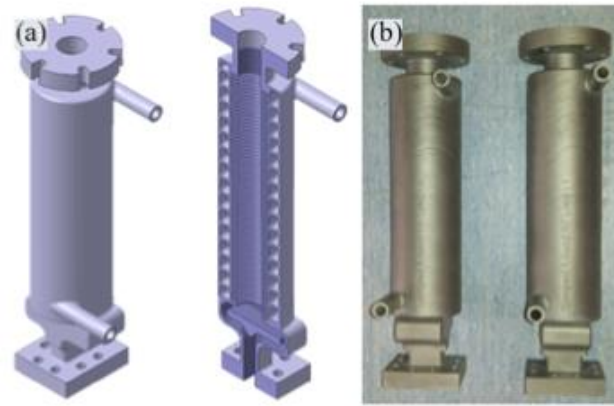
(a) CAD model and (b) photograph of additively manufactured Ti6Al4V WR90 waveguides [209].
